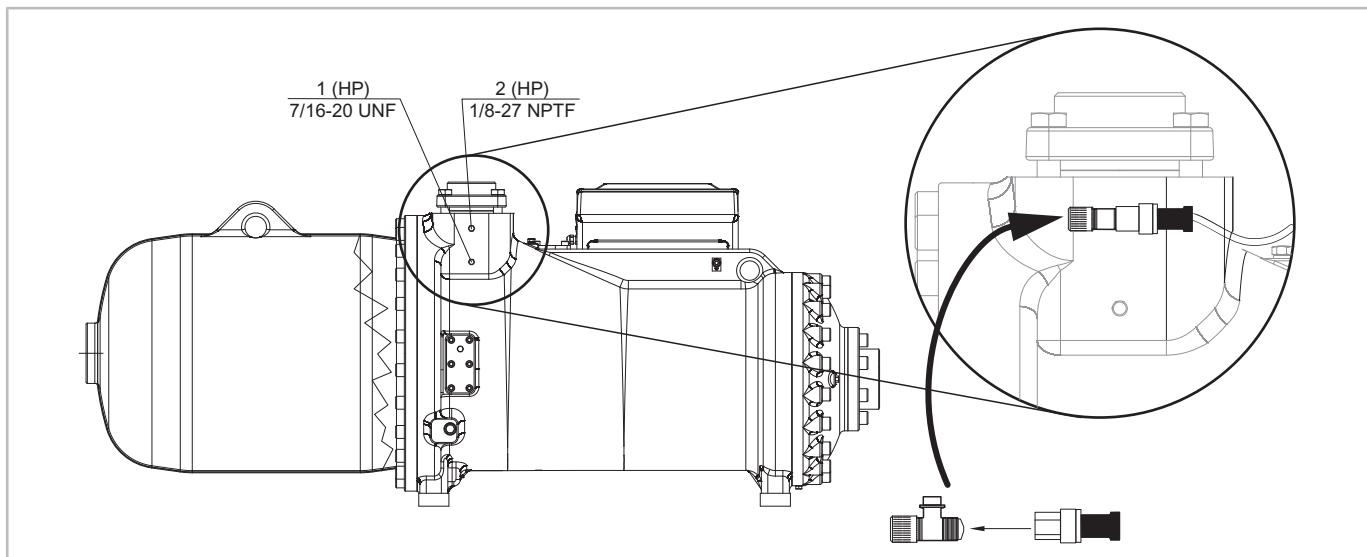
CS.95 compressor: Mounting of the high pressure transmitter
